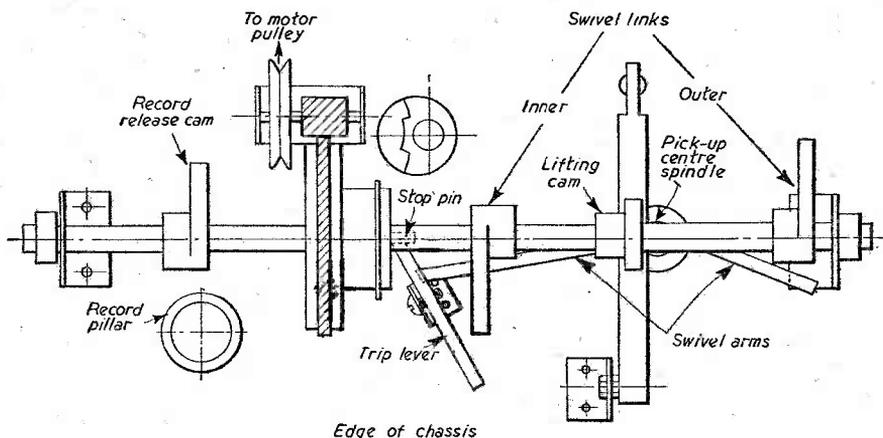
General view of the layout of the parts on the main spindle. As shown, the mechanism is in the "stop" position, with the pick-up on the edge of the record.
